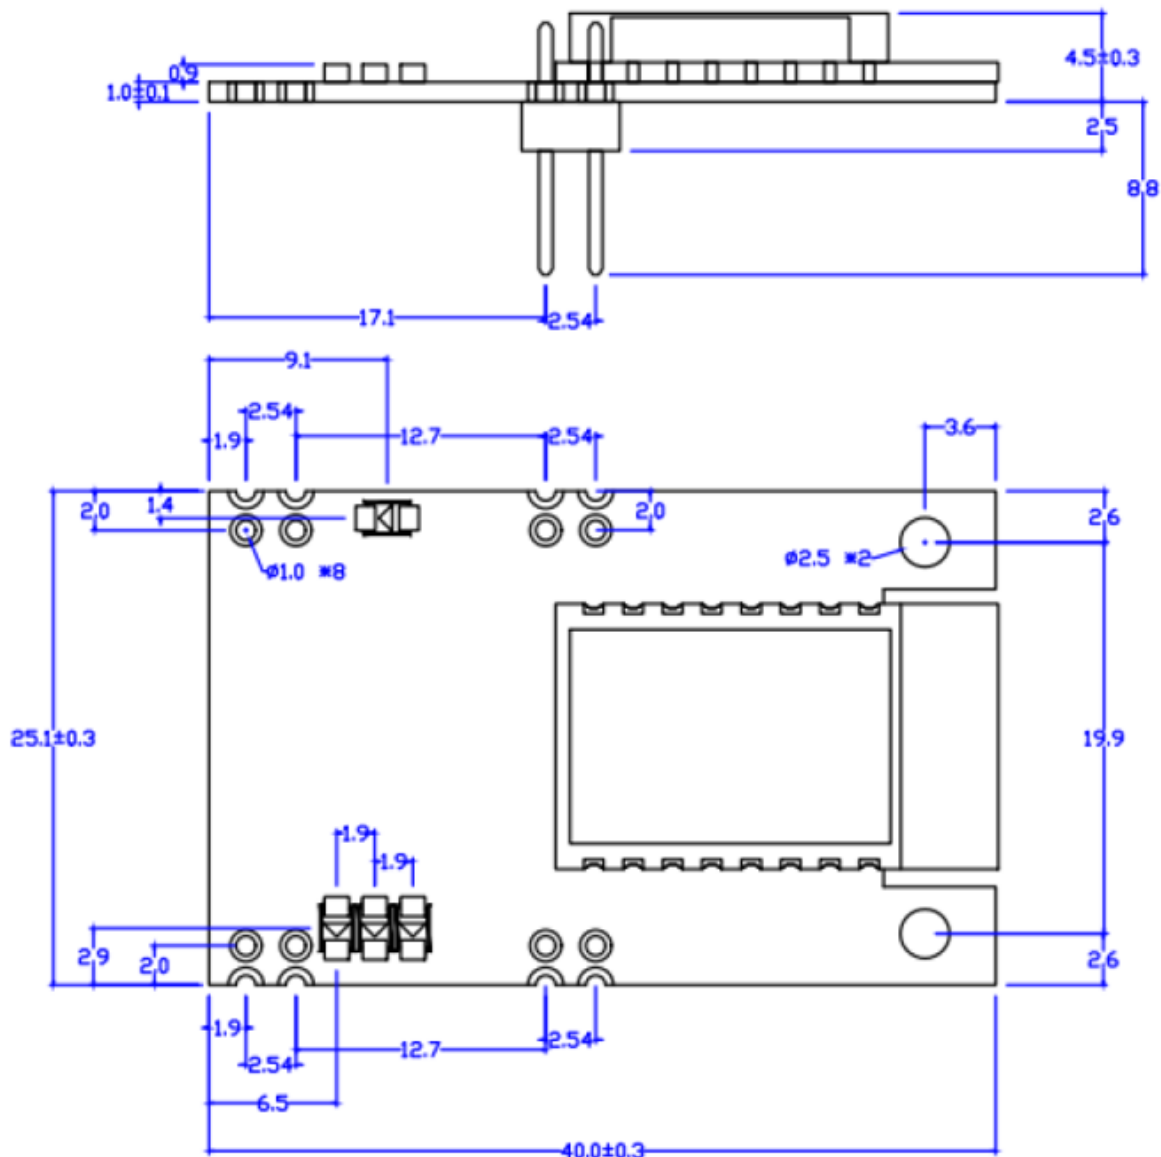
Wport-W71-1/0(2M)-AA Mechanical Dimensions
